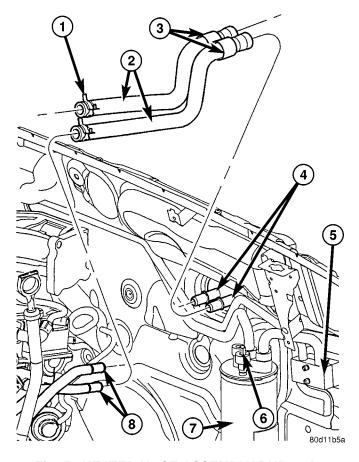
HEATER HOSE ASSEMBLY-RHD 2.0L
